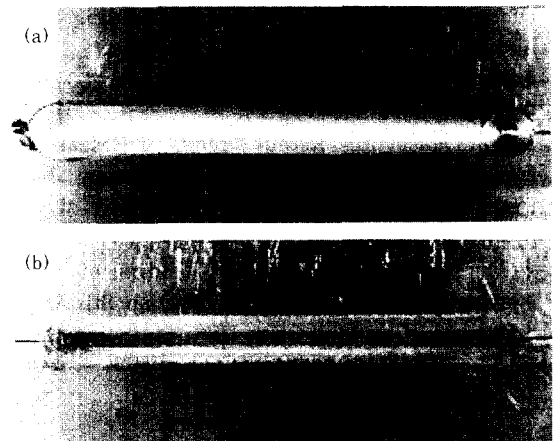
Surface and back appearance of FSW butt joint(6005Al, 4t)
